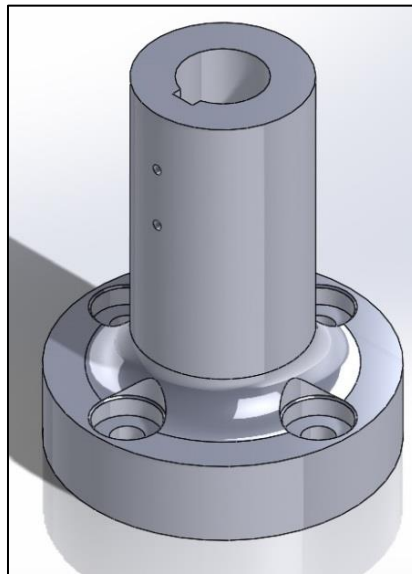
The motor collar attaches to the motor shaft and transmits torque to the rest of the testing apparatus.
